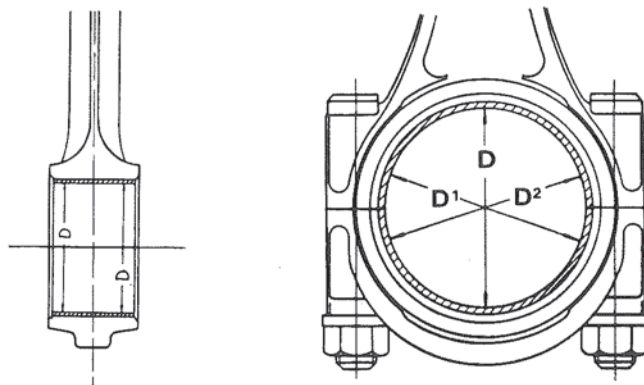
Measuring Points of Inner Diameter of Connecting Rod Bearing.
